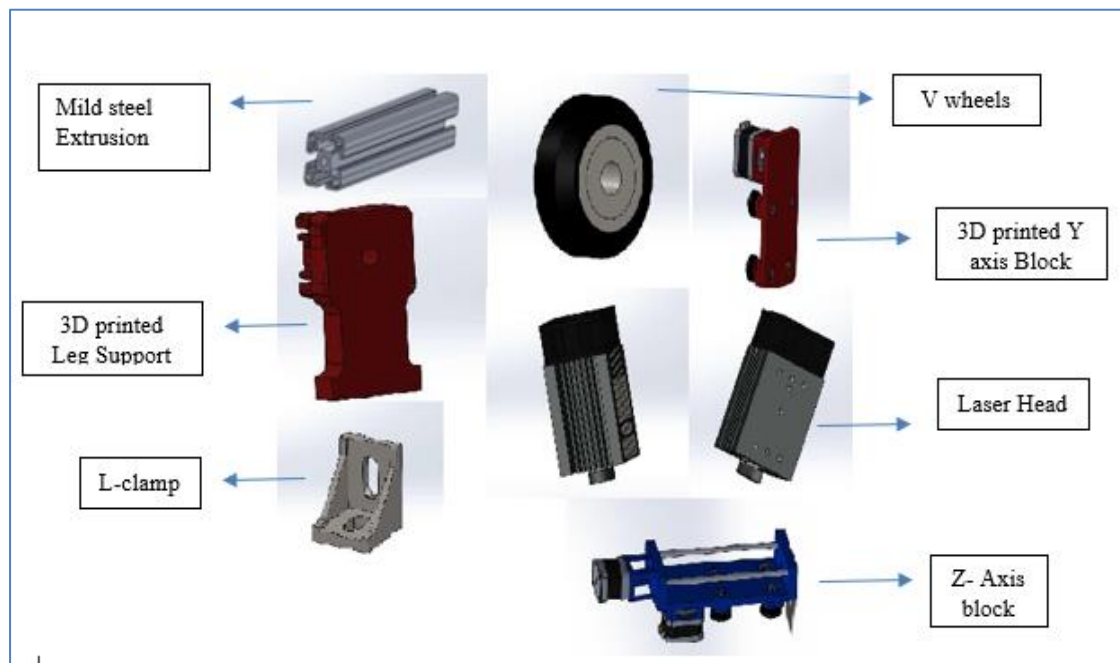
CAD Model of Components of Portable 3-Axis Laser Cutting
